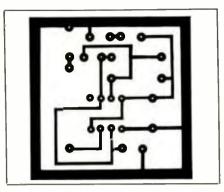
Actual-size etching-and-drilling guide for fabricating printed-circuit board.
